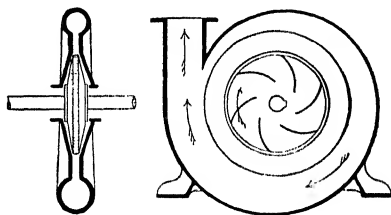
PUMP WITH VOLUTE AND WHIRLPOOL CHAMBER.
